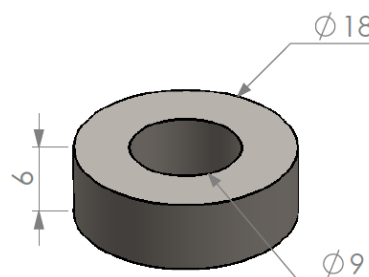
Dimensions in millimeters of the test specimens for the ring compression test.
